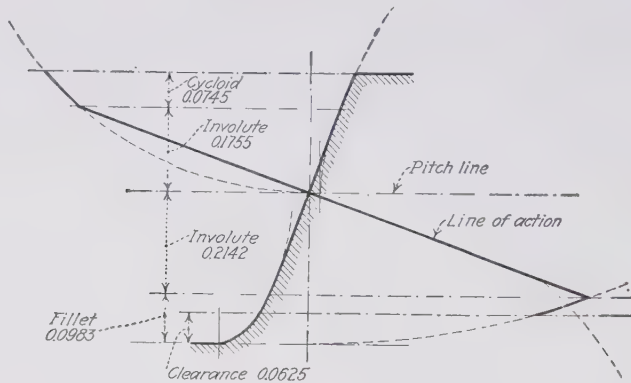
Profile of a rack conjugate to a pinion-shaped cutter of 3-in. pitch diameter, 4 d.p., 20-deg. pressure angle.
